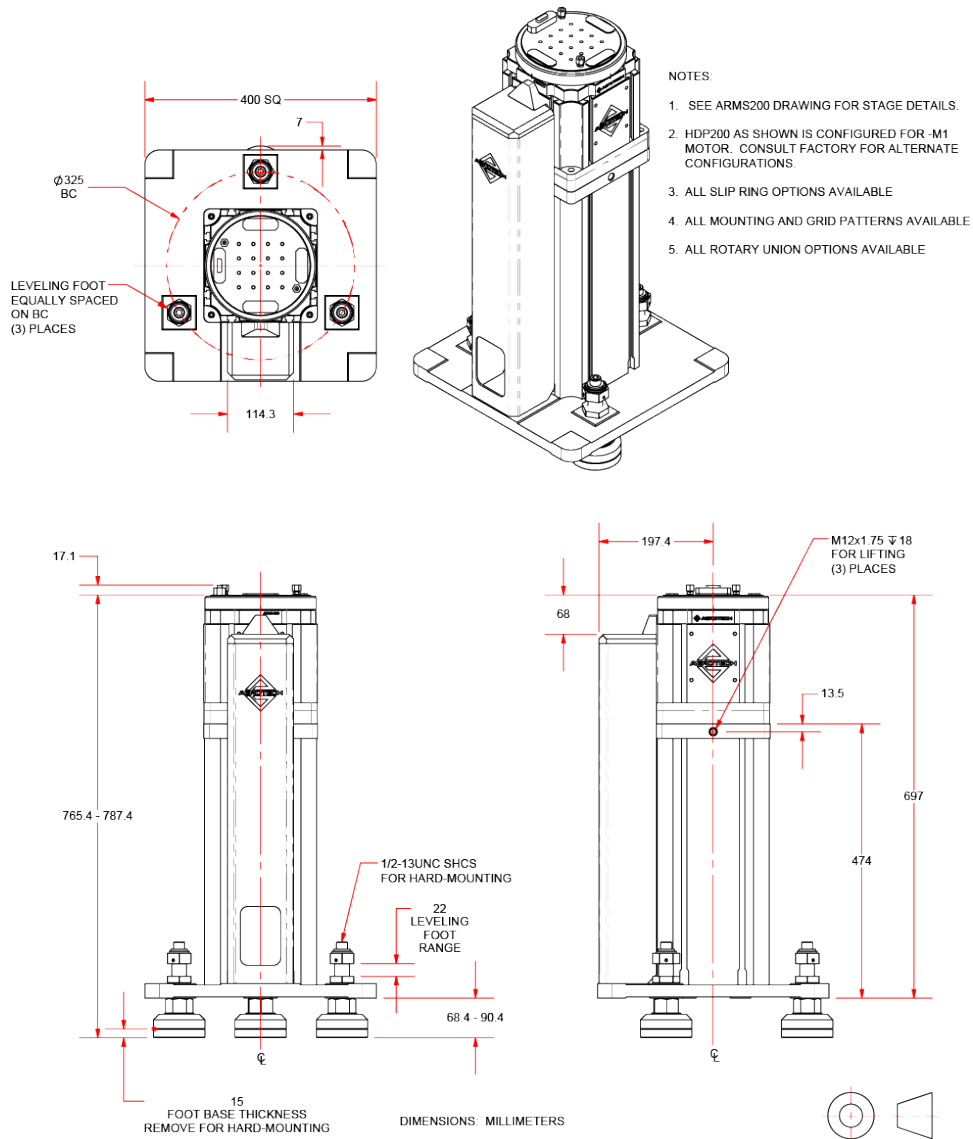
Mounting Pedestal Dimensions for the ARMS200 (-HDP)
